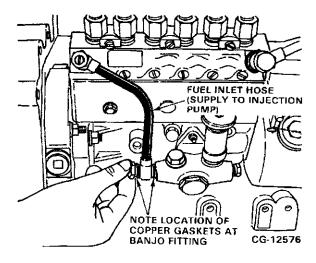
Install Fuel Inlet Hose (Supply Pump to Injection Pump) (Current Production Shown)
